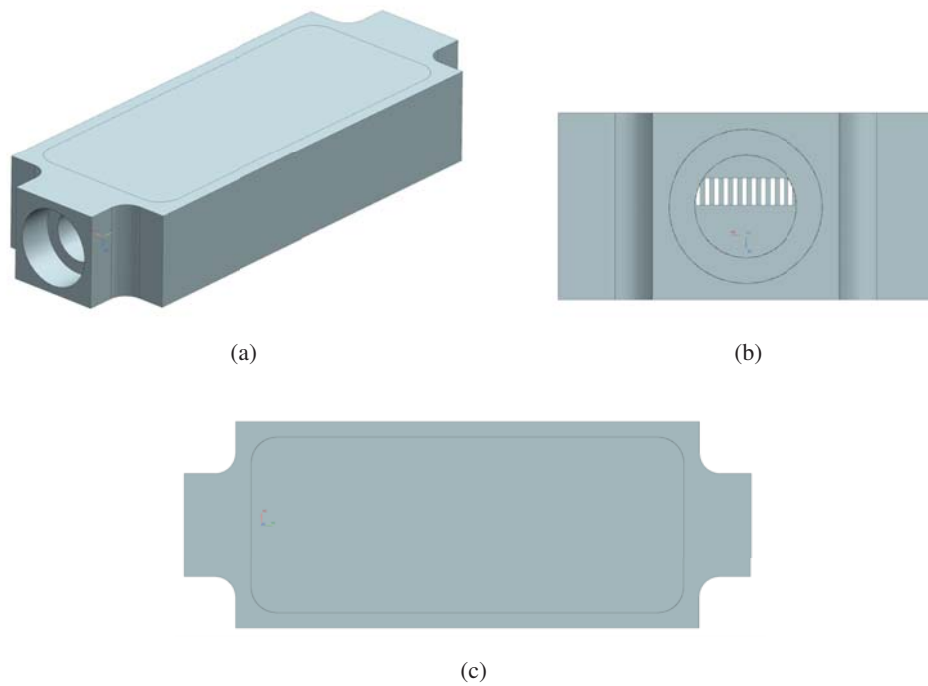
Aluminum microwave module with 25 FPI fin density after two parts united (a) Isometric view (b) Front view (c) Top view
